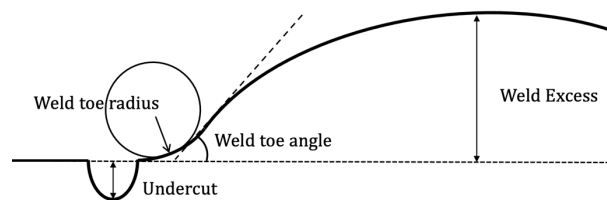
Schematic of typical butt-weld geometry
